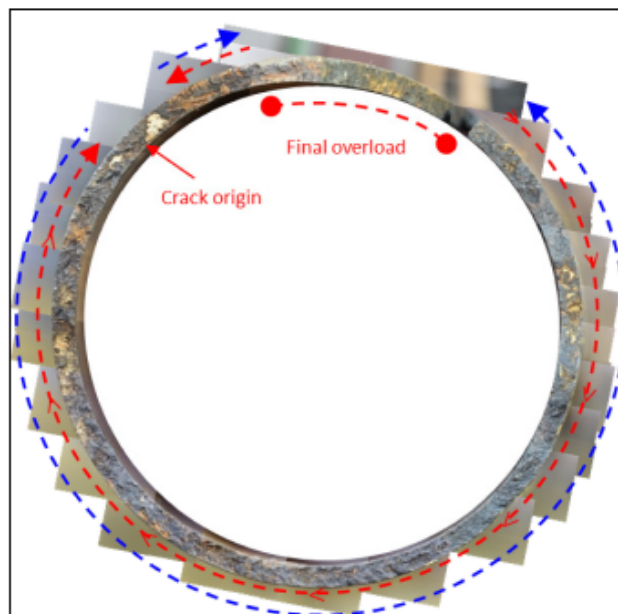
Stitched Images of the Lower Circumferential Parting Fracture Surface
